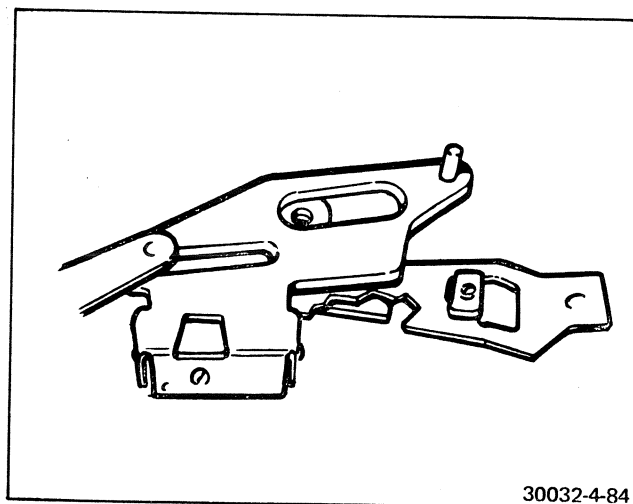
CAM FOLLOWER ASSEMBLY
